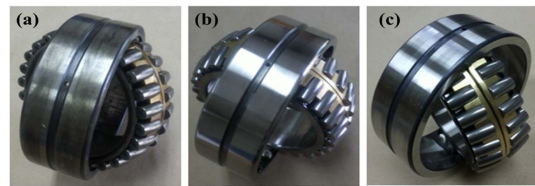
Comparison of the used (a), remanufactured (b) and new (c) spherical roller bearings.
